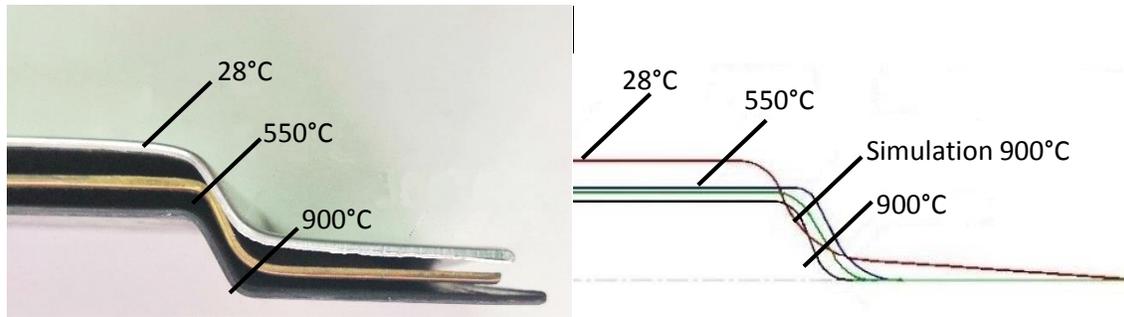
Bending angle of workpieces under different pre-heating temperature.
